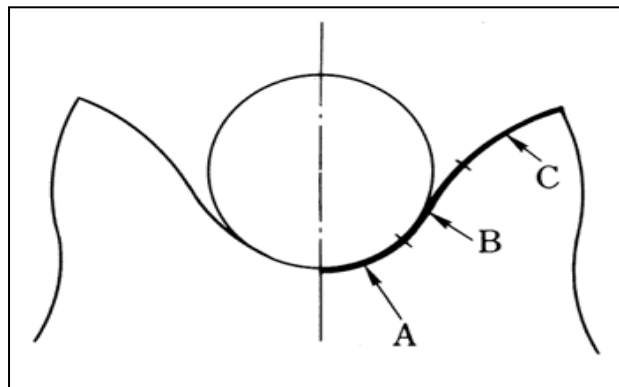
Sprocket Tooth Shape and Positions of Engagement
